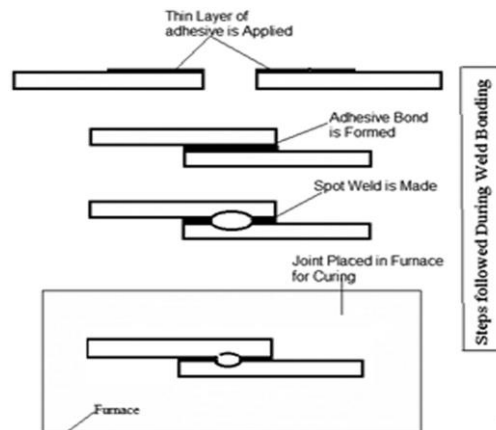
Schematic representation of steps in weld-through technique of weld bonding (Mittal et al. 2012)
